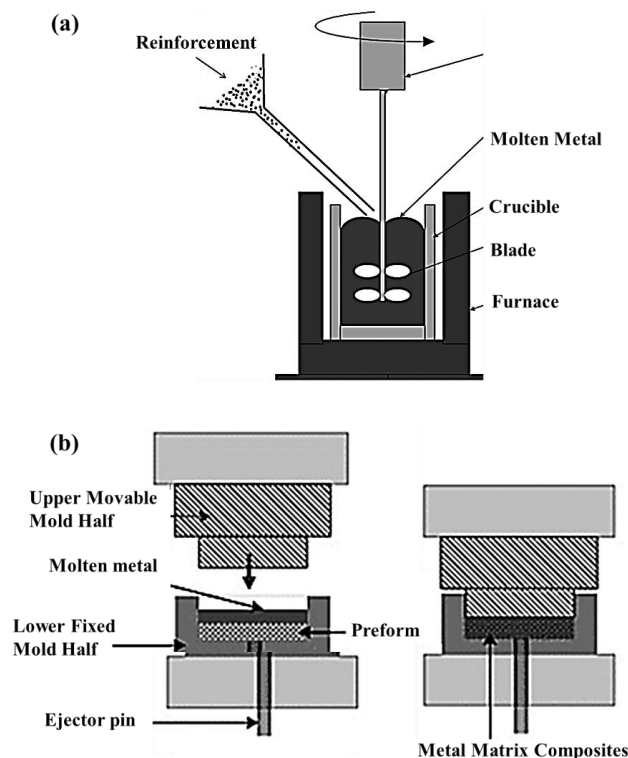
Schematic illustration of (a) Stir casting process [22] and (b) Squeeze casting process [23].
